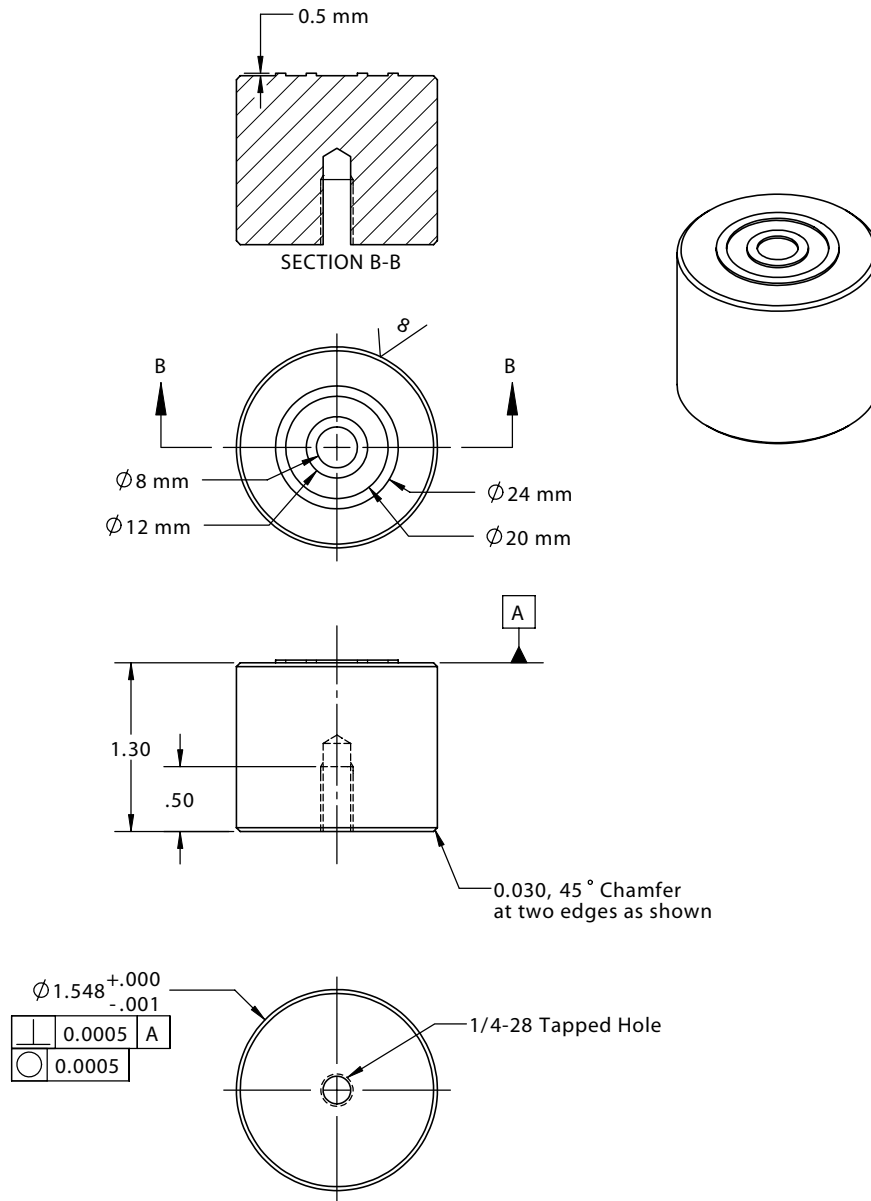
Drawing of axisymmetric embossing tool. All dimension are in inches unless otherwise noted.
